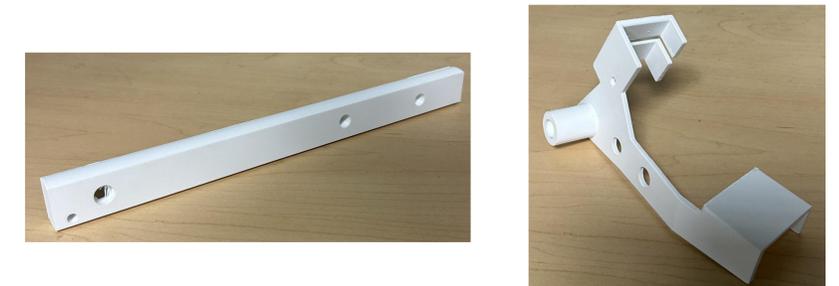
and 3: Shows the front fork mounting bracket design in CAD
